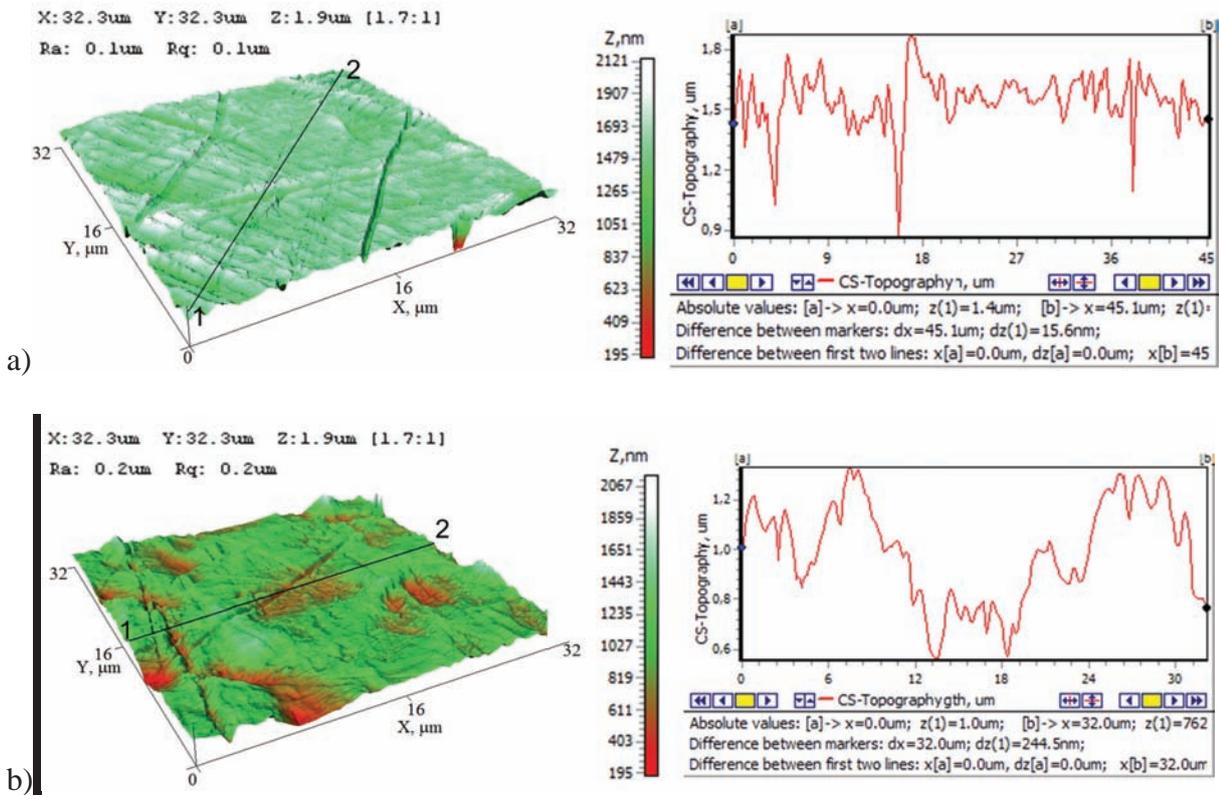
Surface topography (with indentations) of bearing sleeve made of bronze. 3D view and cross-section, for: a) non-used bearing sleeve b) used bearing sleeve
